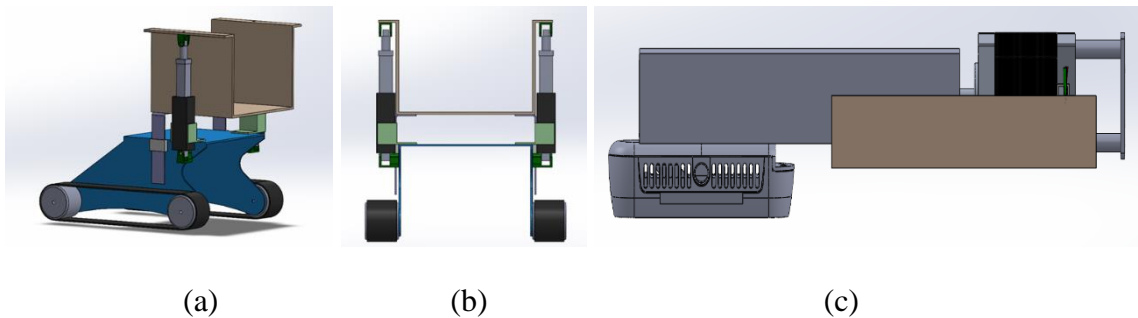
(a-b) CAD model of the robot prototype platform demonstrating the height adjustment mechanism using the PA-07 actuator. (c) Stereo camera mounted on the platform
